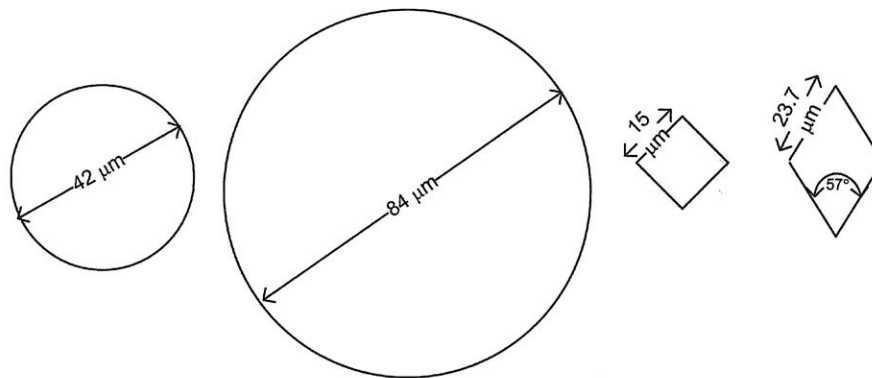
The four types of 2.5 dimensional tips which are plated directly onto the bottom coupon wafers.
